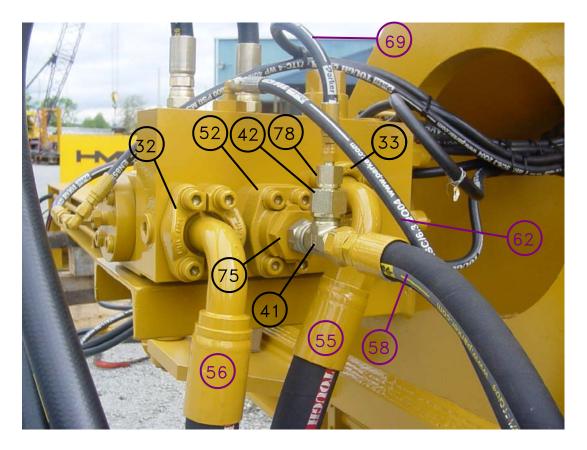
LHS SHOWING WINCH MANIFOLD
